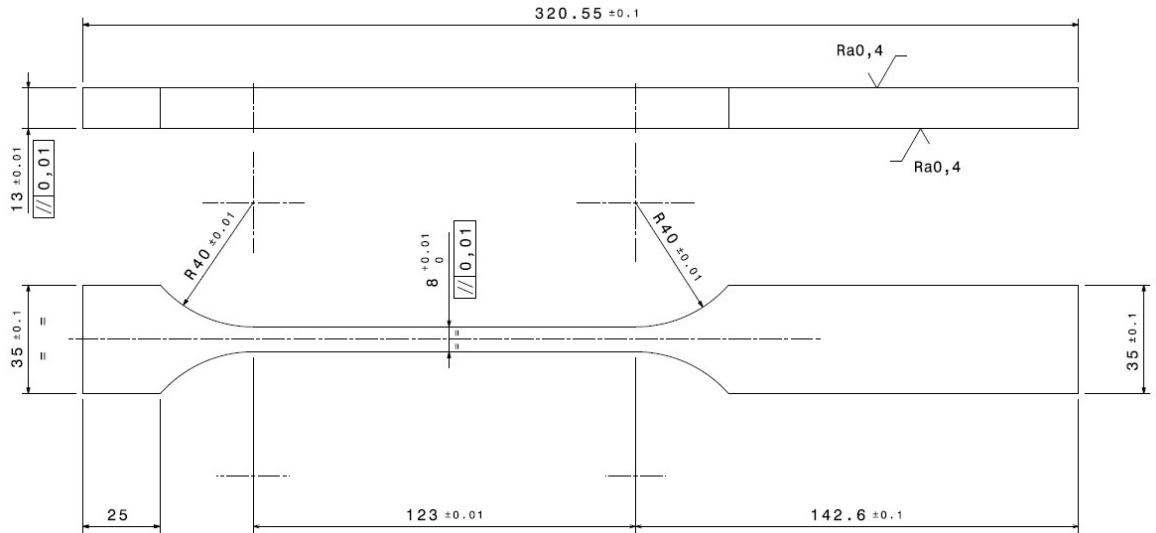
Fretting-fatigue main specimen of the second group of tests (dimension in mm)
